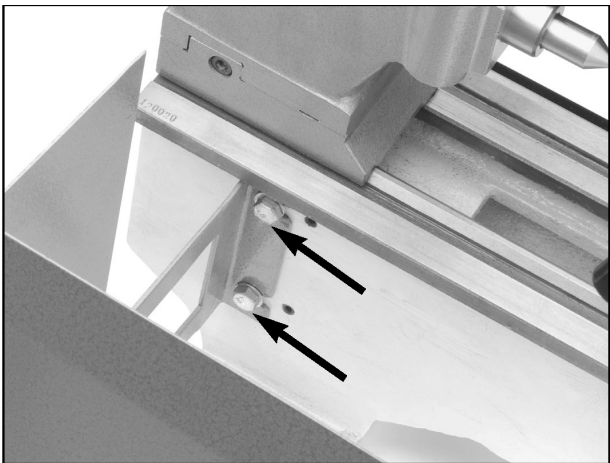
Two hex bolts / washers secure the right-hand side of the back splash to the lathe.
